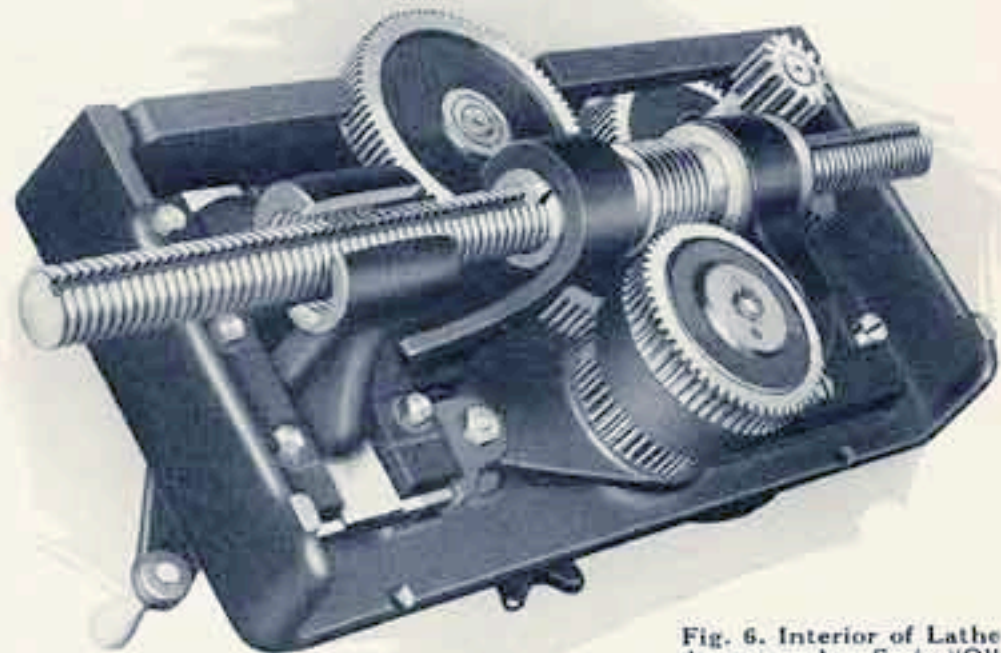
Interior of Lathe Apron used on Series "O" South Bend Lathes.
